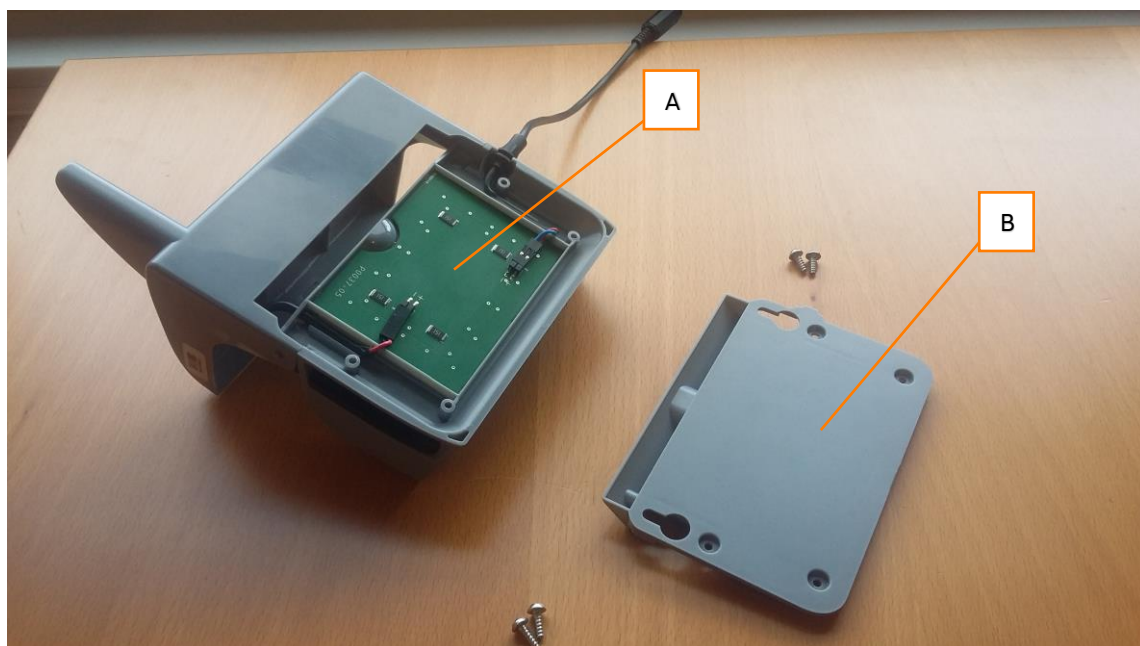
Smart sense from the back. A) Heater PCBA mounted in casing. B) Backplate to be mounted on top of heater PCBA.
